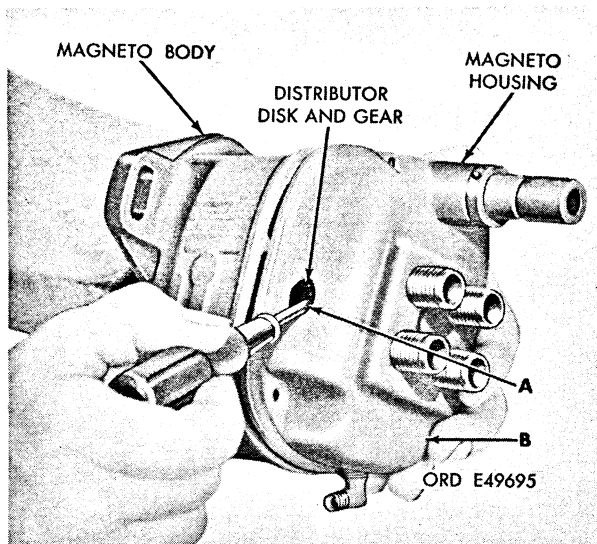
REMOVING MAGNETO HOUSING.
